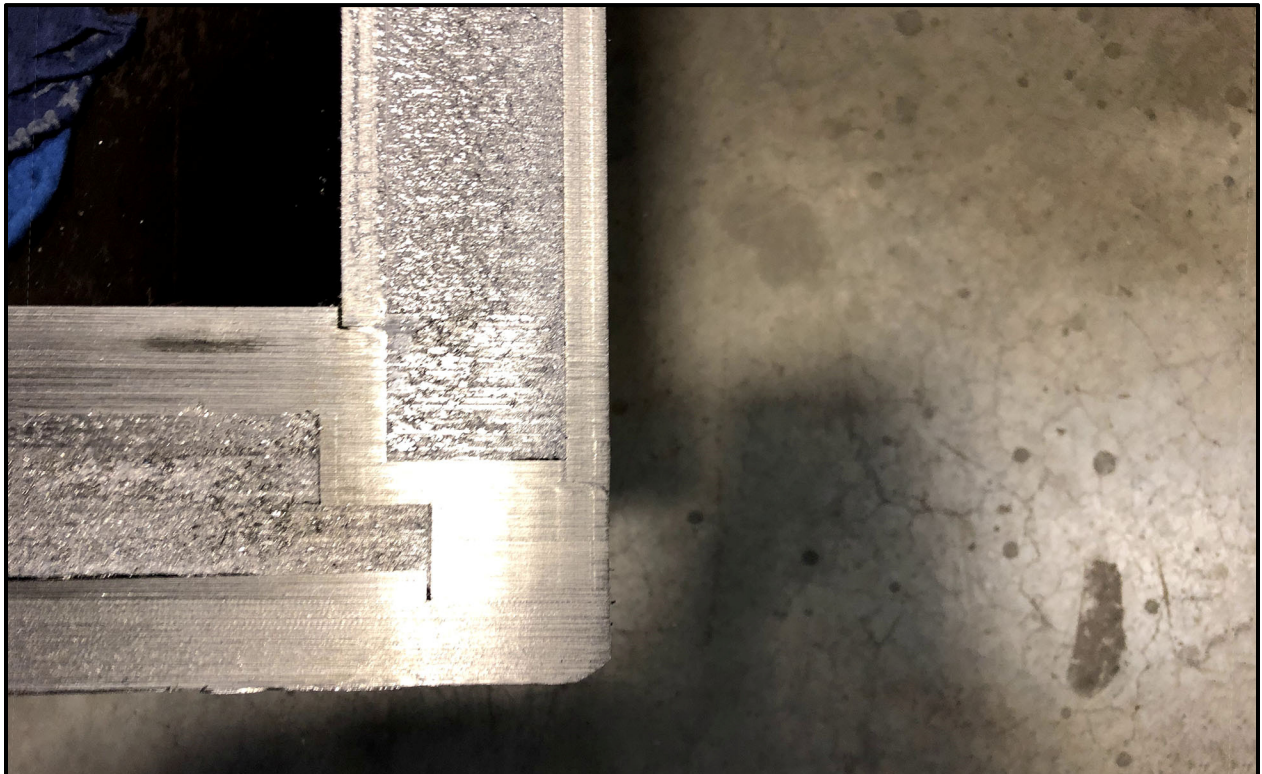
SC-55G2 18TU-10 Destructive Disassembly Cut AM/AN at Lower Flange
